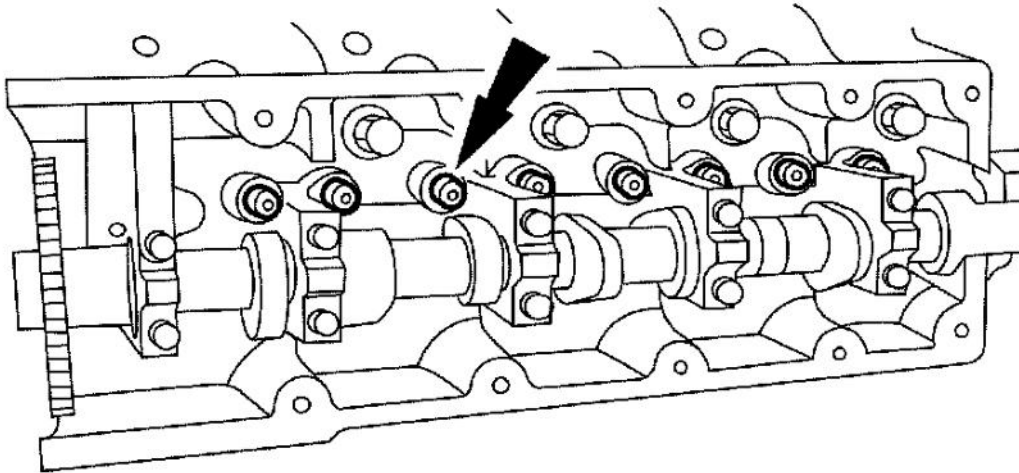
Identifying Cylinder Head Components With Torque Specifications
